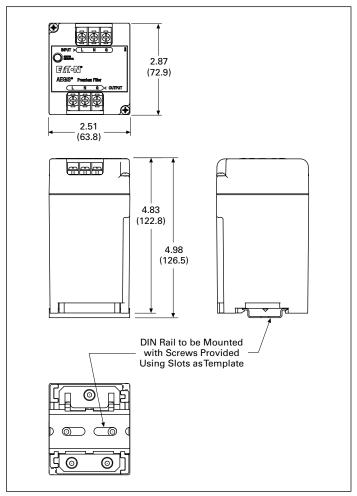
AGPVxxxxx Dimensions in Inches (mm)
